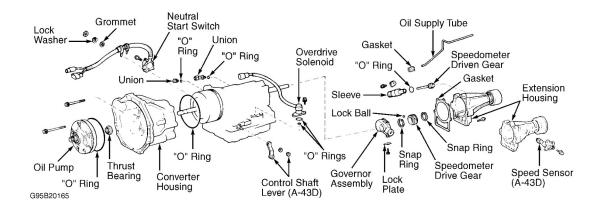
Identifying Transmission & Extension Housing Components (A-43D Shown; A-46DE & A-46DF Are Similar)
